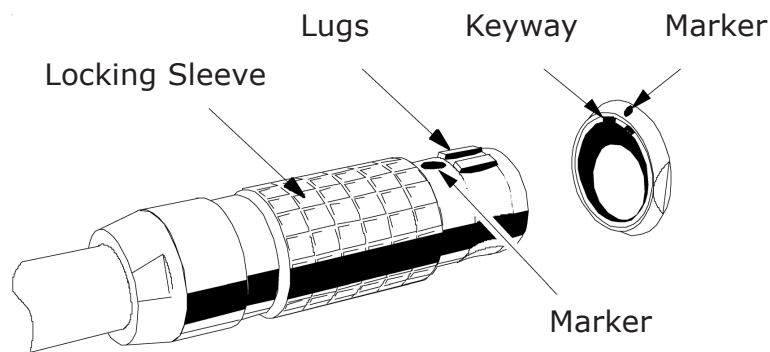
Connection Of The Pre-wired Cable To The Thermometer
